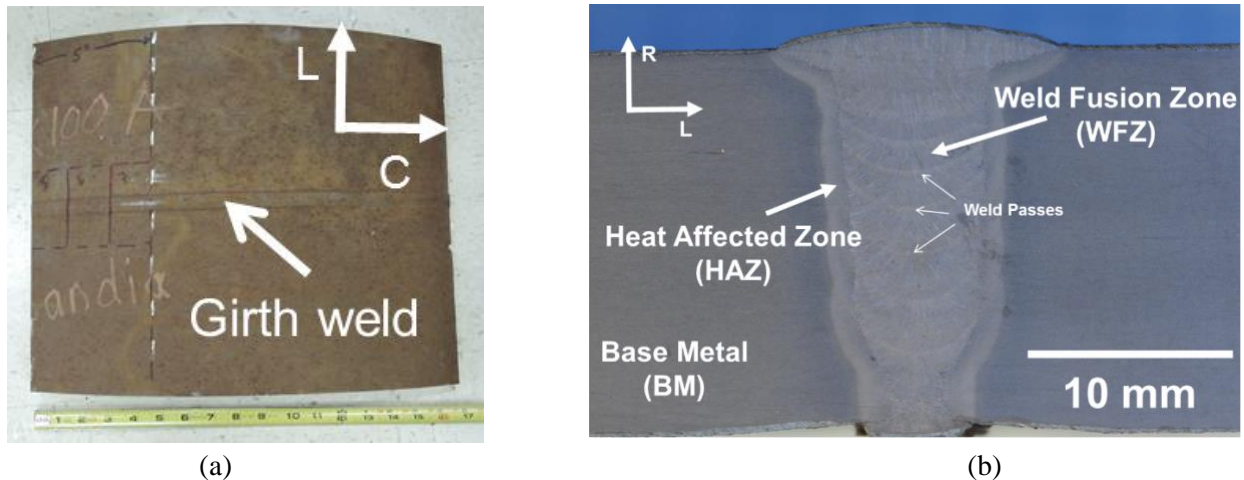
(a) Optical image of a section of X100 girth welded pipe, (b) Macroetched image of gas metal arc weld which reveals distinct sections of weld: weld fusion zone (WFZ), heat affected zone (HAZ) and multiple weld passes.
